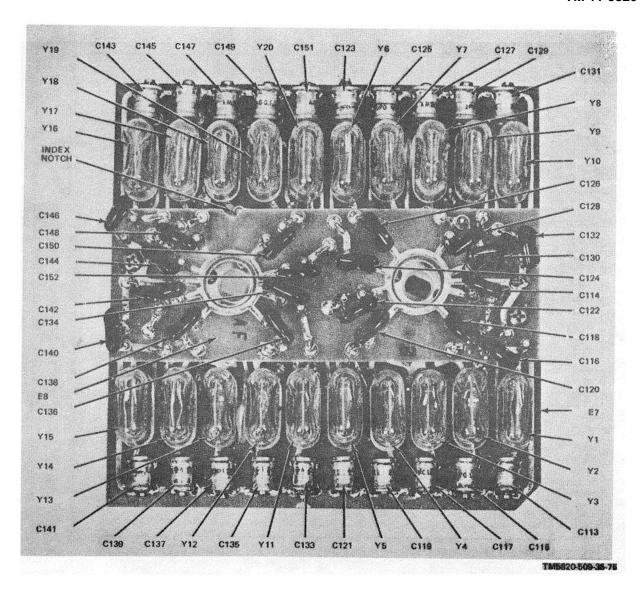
Oscillator Control C-4311/PRC-47 (A8A7), Card Assemblies E7 and E8, Front View.
